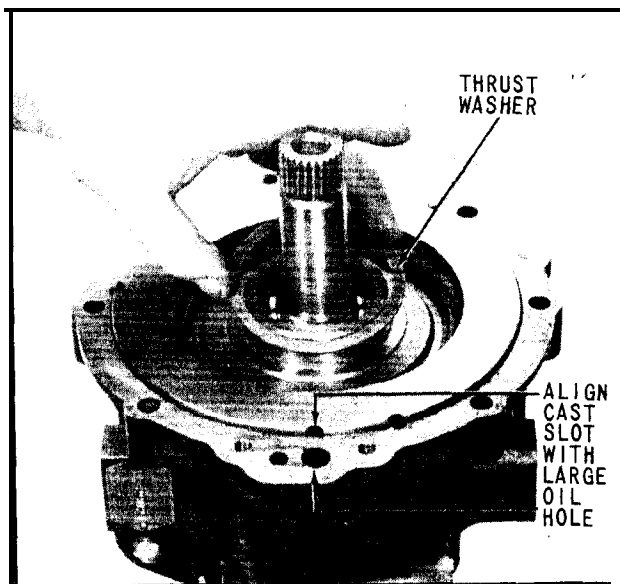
Installing Thrust Washer and Reverse Clutch Pressure Plate
